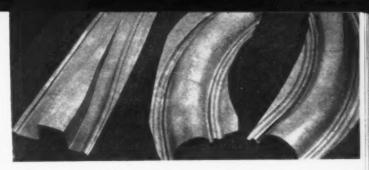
Titanium ducting parts formed on a drop hammer at 1000°F. Rubber pad was used underneath left hand part to hold shrinkage. Other two parts were drop hammer formed without pads.
